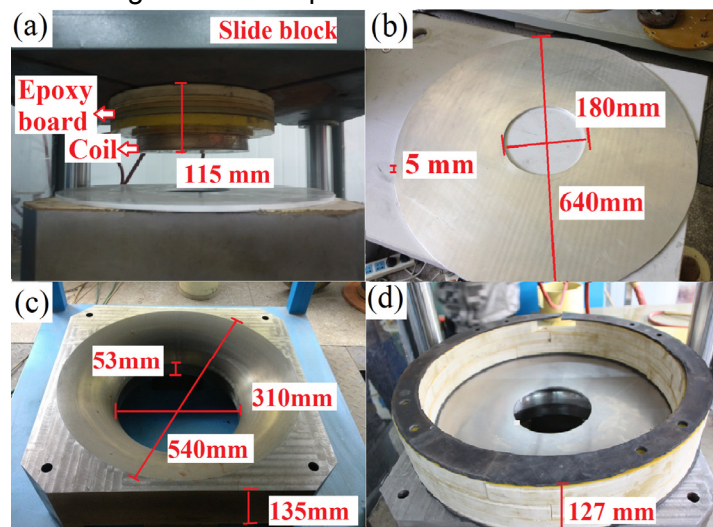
(a) The coil and several epoxy boards were fixed on the slide block; (b) the workpiece; (c) the die; (d) the blank holder [8].
